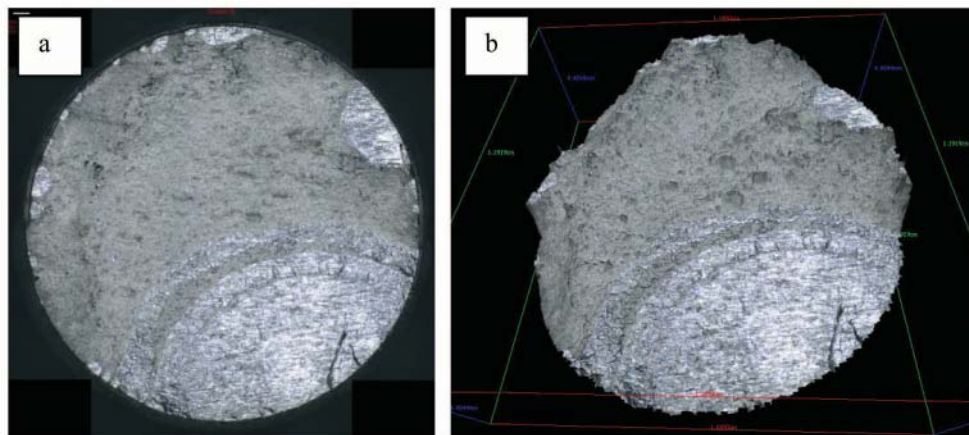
Fracture surface of a coupon after a fatigue test (5x magnification).
